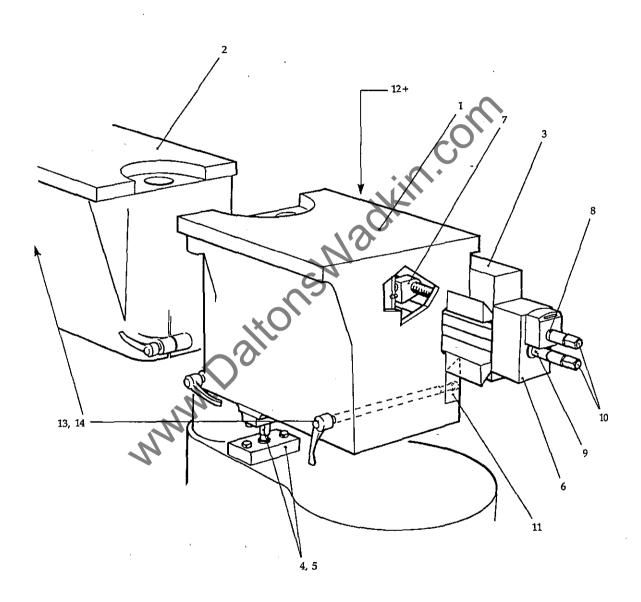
FENCE & NEAR SIDE CARRIAGE ASSEMBLY
